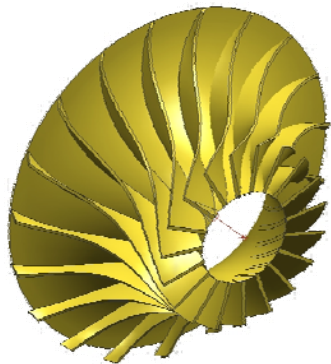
CAD Model of Centrifugal Compressor Impeller
